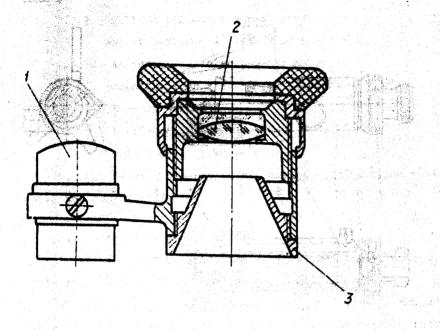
Illuminator 1-bushing; 2-lens; 3-bushing.
